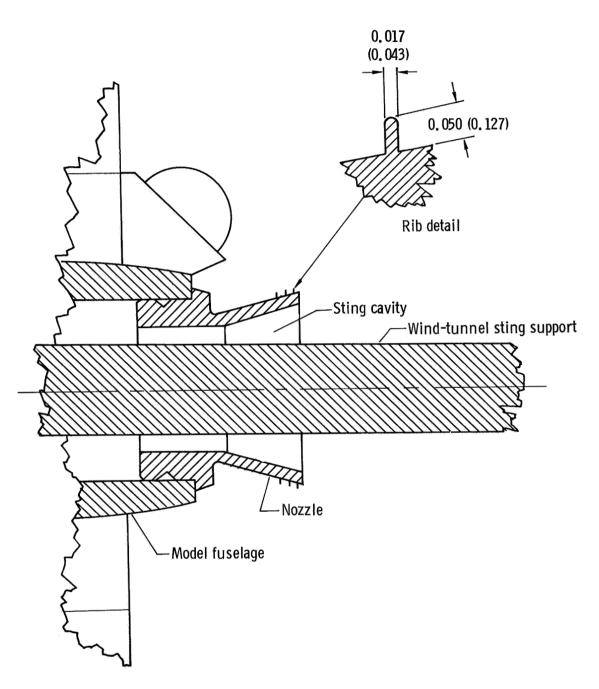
Nozzle extensions used in force and pressure investigations. Dimensions in inches (centimeters).
